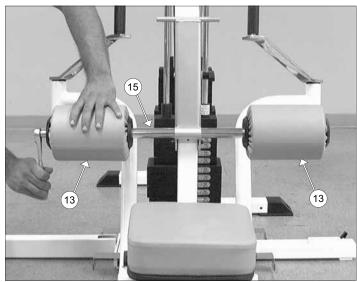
Insert two Foam Rolls 1 X 5 1/2 X 7 1/4 (#13) to the tubeends of the Foot Roll Tube 1 X 27 (#15) and secure them into place using two Button Head Socket Cap Screws 3/8-16 X 1 (#71), two Split Lock Washers 3/8" (#152), and two Chrome Washers 3/8 X 1 1/2 (#74).
